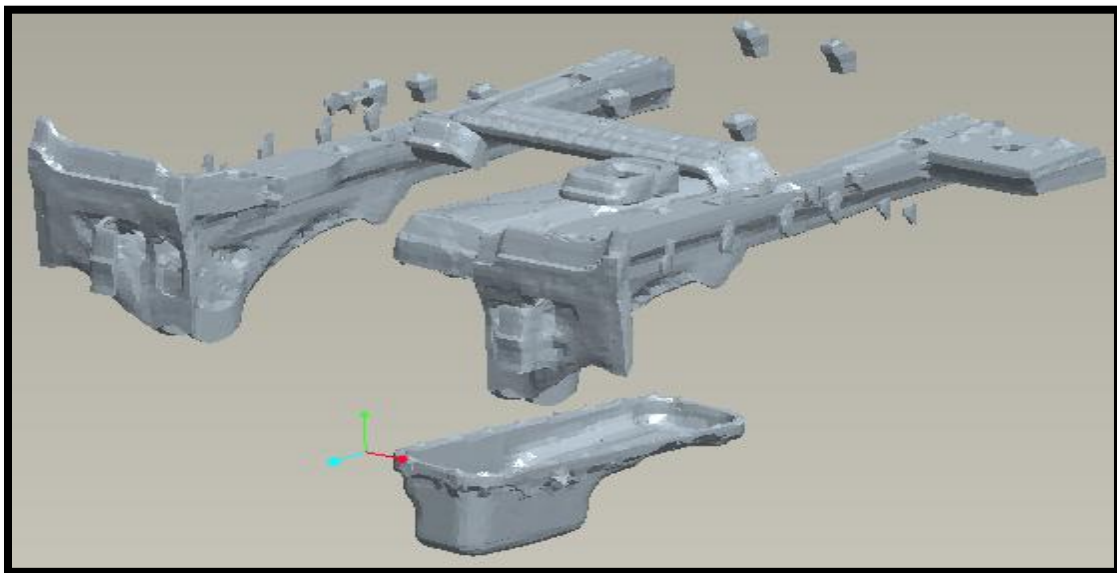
Envelope of Cab floor, Engine cover and Engine oil sump using Pro-E Mechanism.
